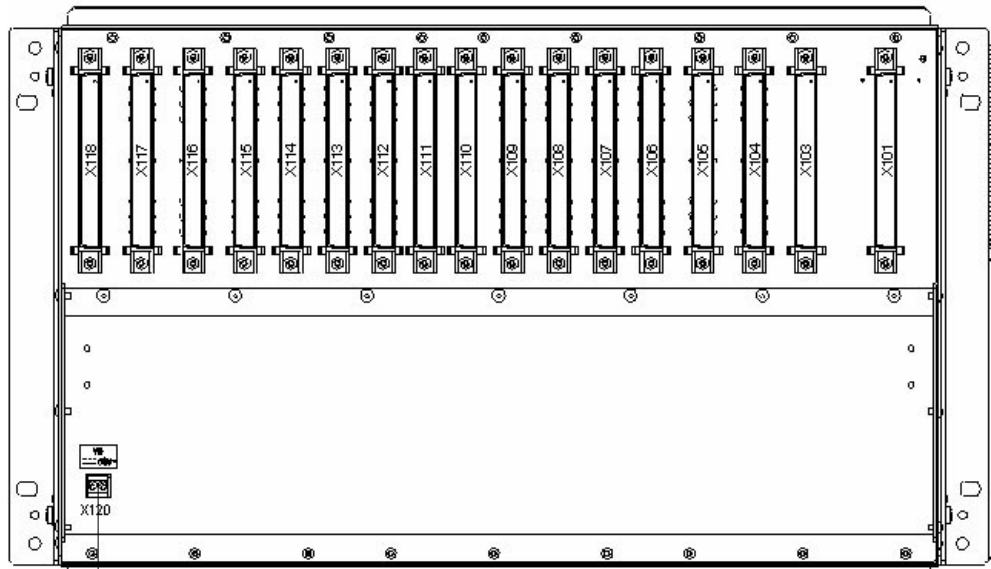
MXS19C Front View without Front Cover, Unequipped
